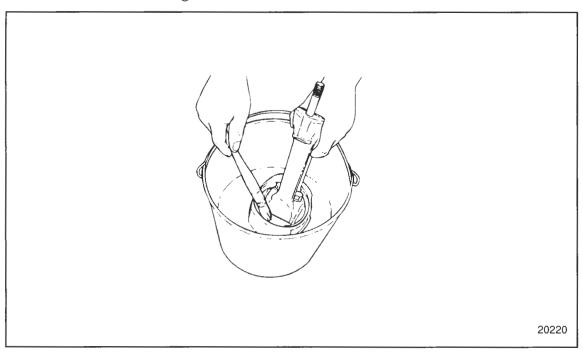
Piston and Connecting Rod Assembly Lubrication
